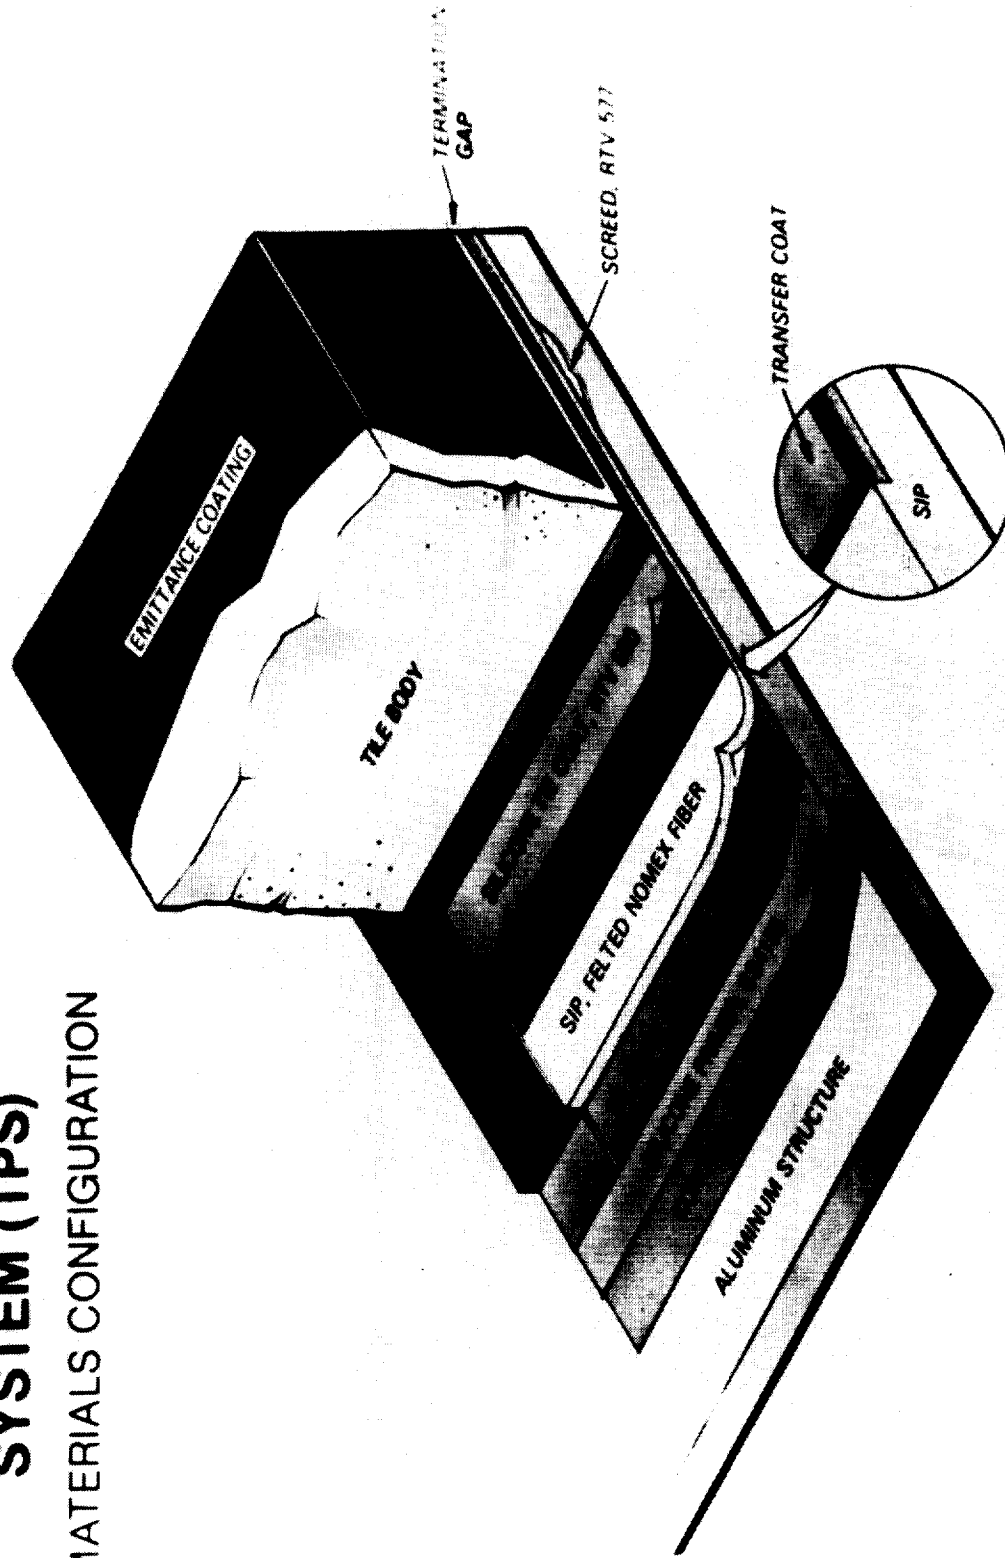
C. Detailed view of the rigid RSI (tile) assembly.
